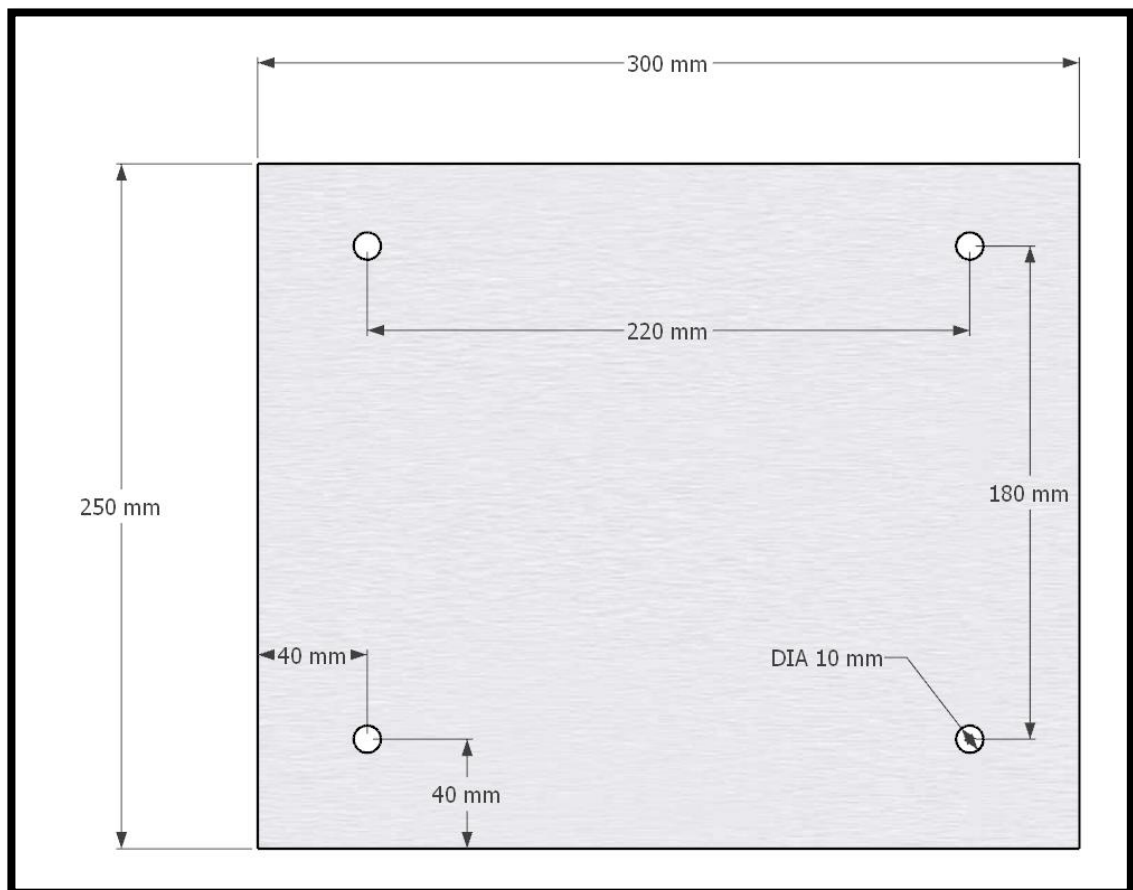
Side View of Steel Connector Showing Layout of Bolt Location
